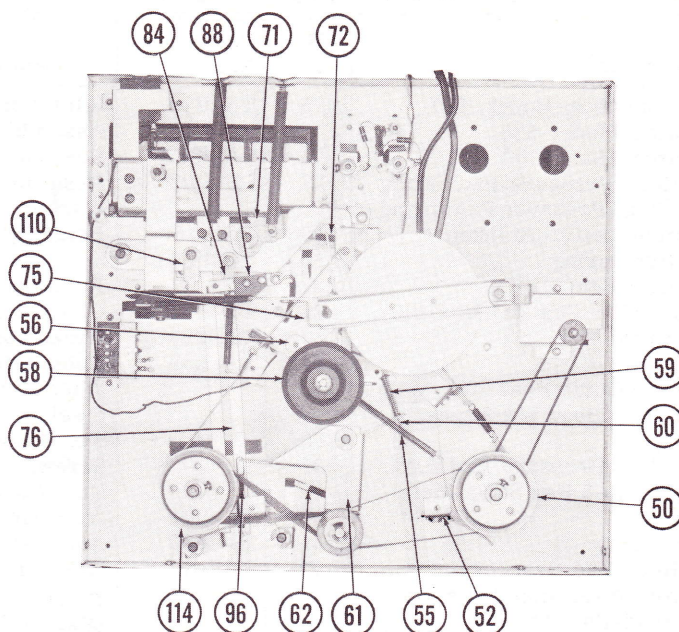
BOTTOM VIEW OF MECHANISM WITH MOTOR ASSEMBLY REMOVED
